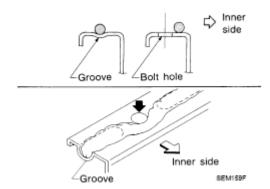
Applying Bead Of Sealant To Bolt Holes
